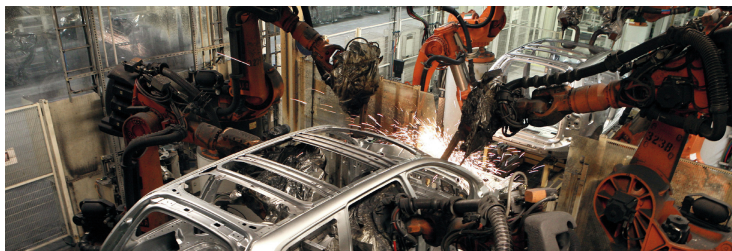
An assembly cell performing welding tasks on a workpiece that transitions through the assembly line.
